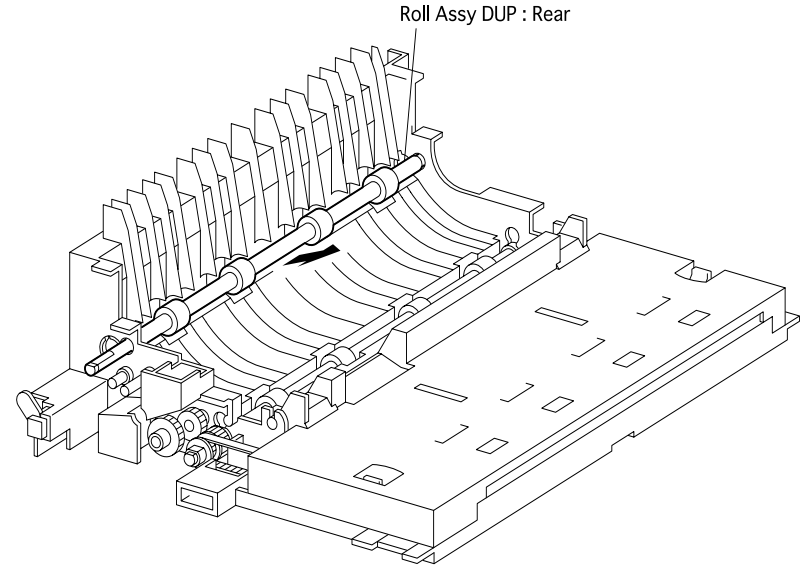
Roll Assy DUP: Rear Removal (2)
